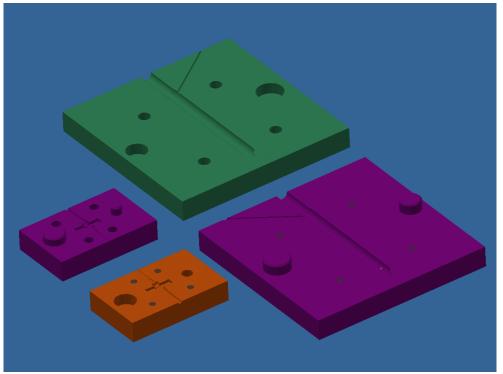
Initial Casting Mould Designs for Steerable Bougie Tips
